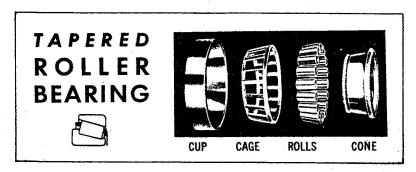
Tapered Roller Bearings - Cup-Cage-Rolls-Cone
